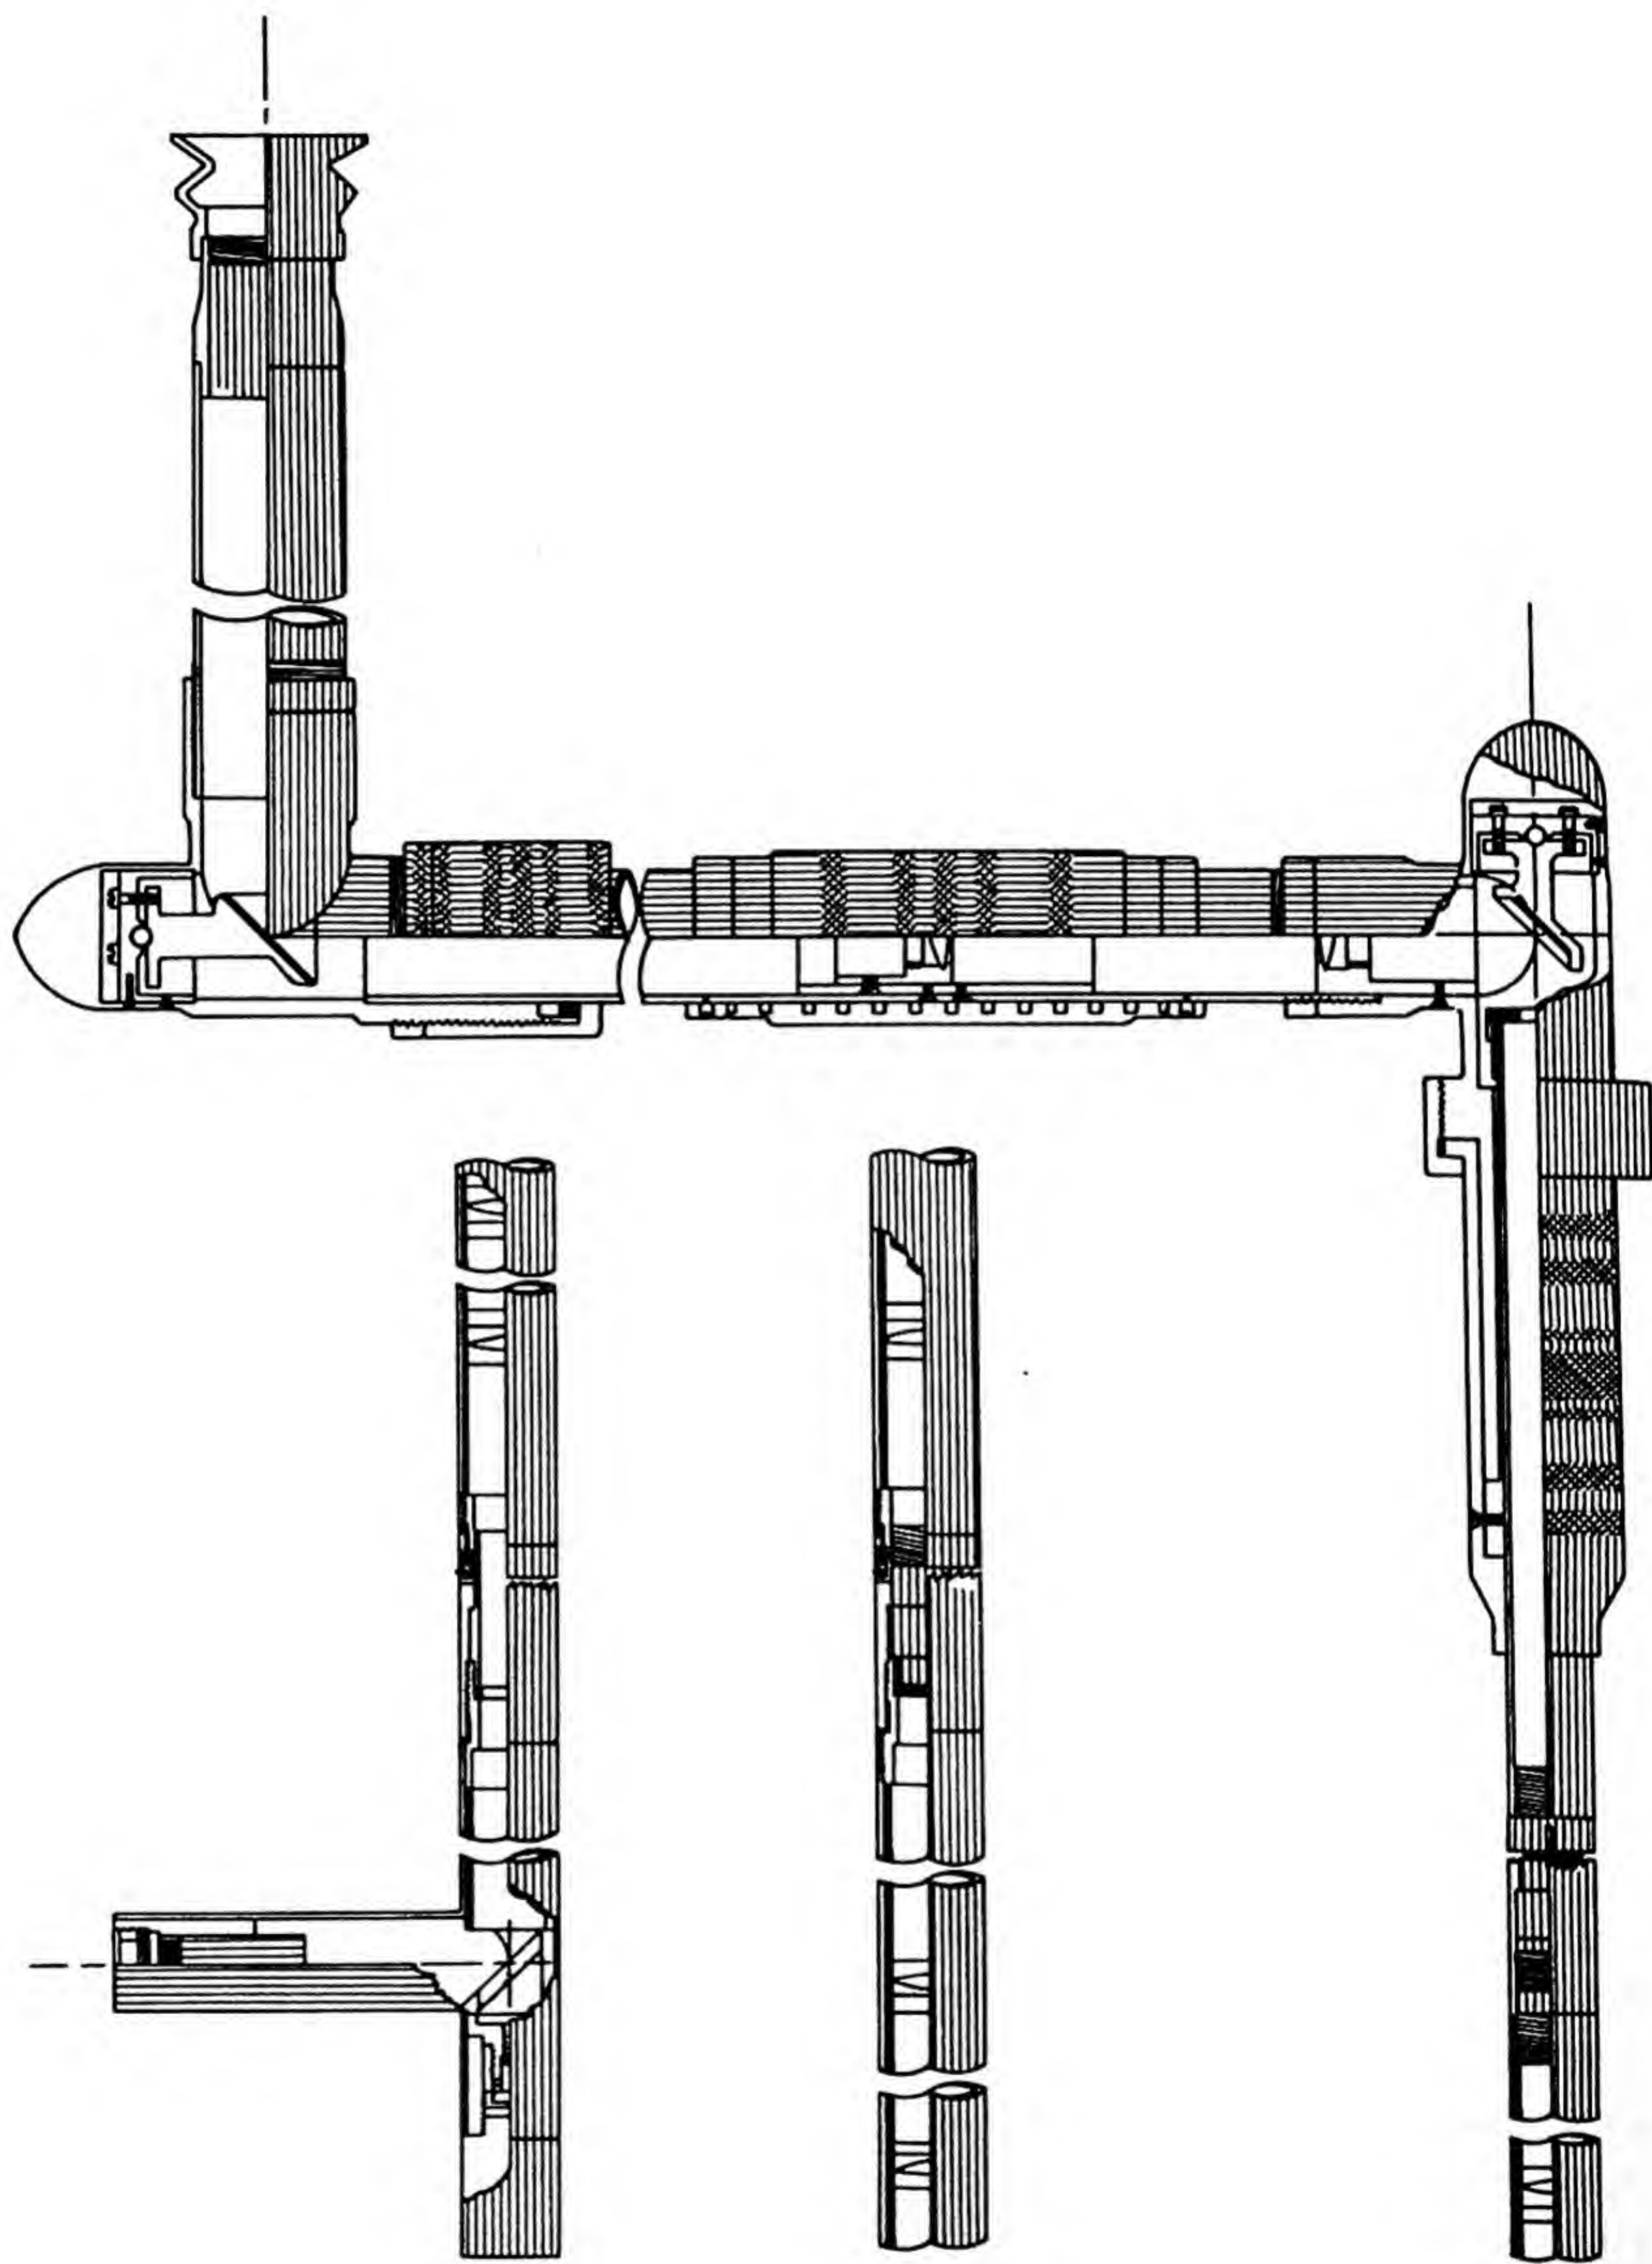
Broken-away assembly drawing of underwater bar viewer.
